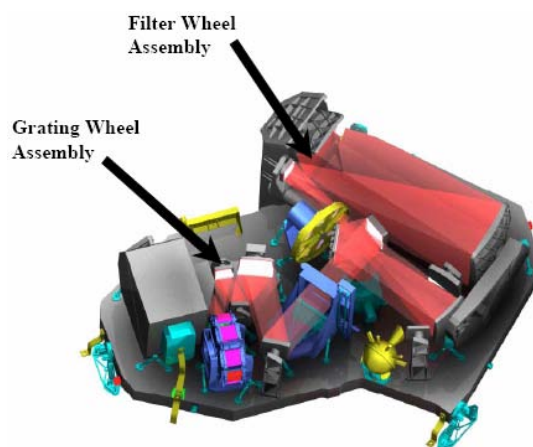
The NIRSPEC instrument (picture courtesy of EADS Astrium GmbH) with the Filter and Grating Wheel Assemblies.
